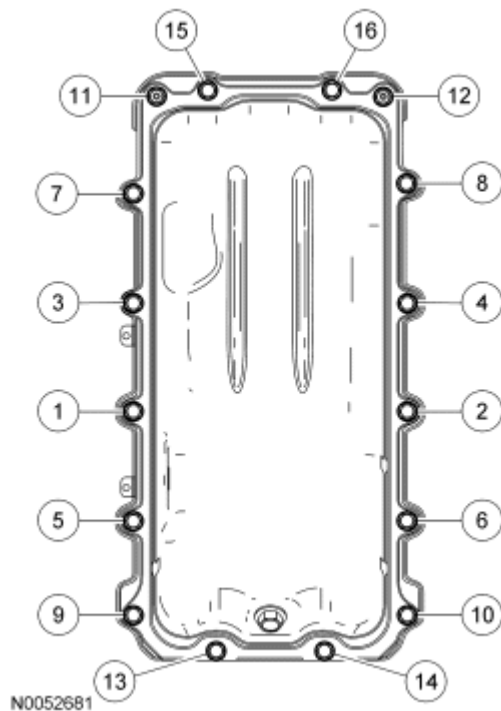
Installing Oil Pan Bolts & Stud Bolts In Sequence
